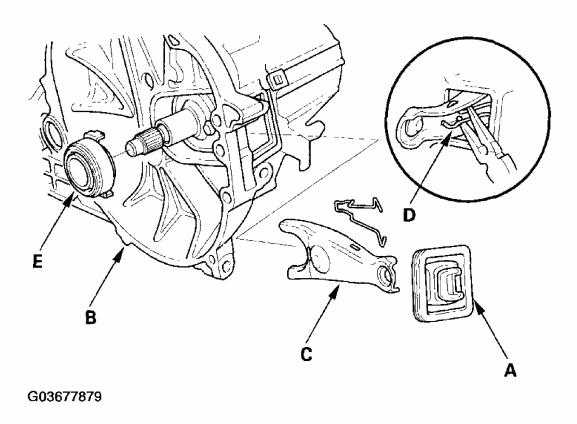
Removing The Release Fork Boot From Clutch Housing Courtesy of AMERICAN HONDA MOTOR CO., INC.
